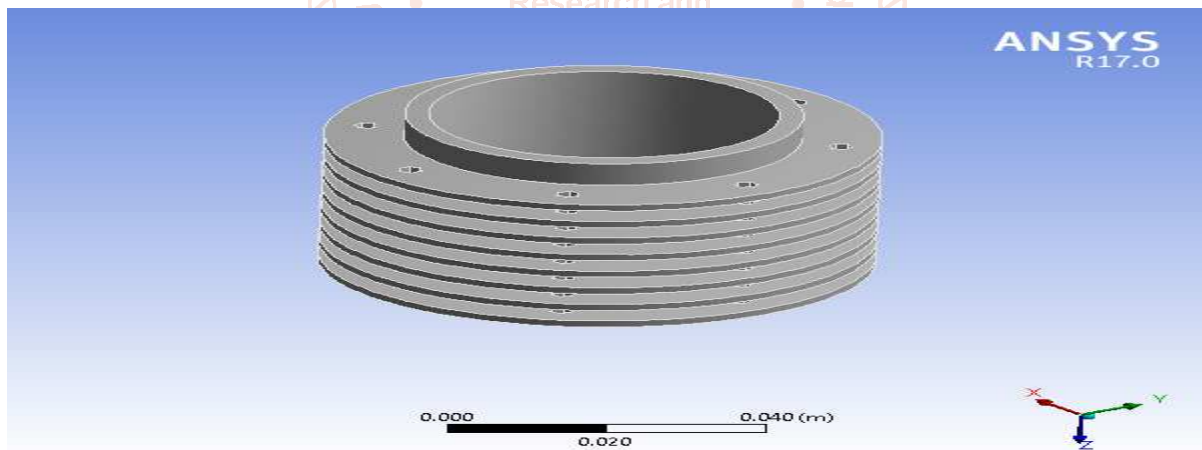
The geometrical model of engine cylinder fin with hexagonal hole (proposed design)
